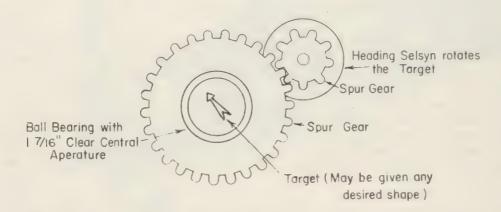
A Schematic Drawing Showing Details of the Gear Arrangement that Rotates the Photographic Transparency which Is Located Immediately in Front of the Field Lens.
